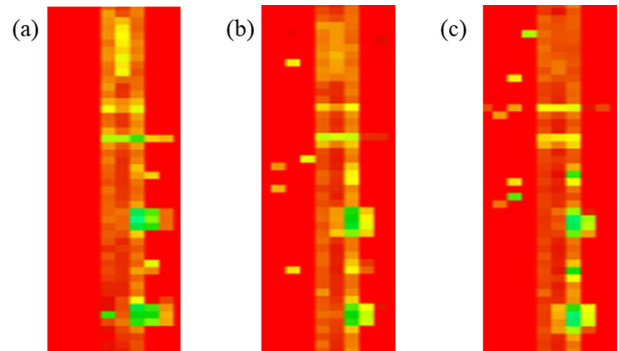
Conventional C-scan inspection result: (a) inner defect between 2~3 layer, (b) center defect between 18~19 layer, and (c) outer defect between 34~35 layer
